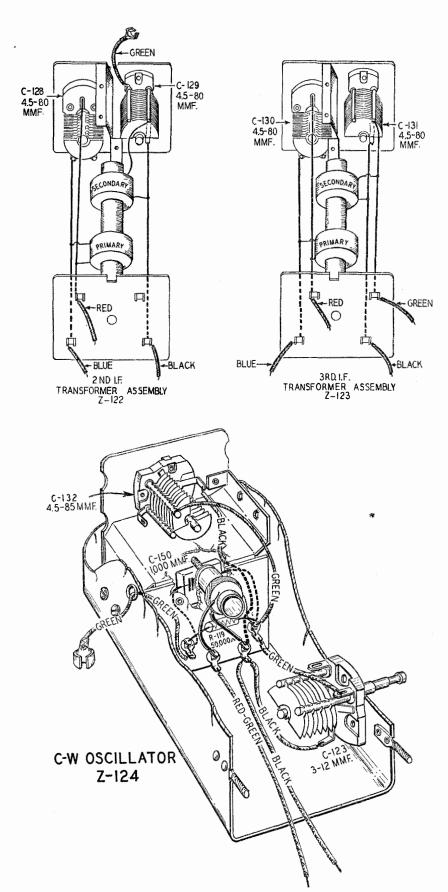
Pictorial Diagram of I-F Transformer Assemblies
